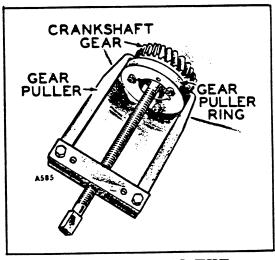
REMOVING THE CRANKSHAFT GEAR
